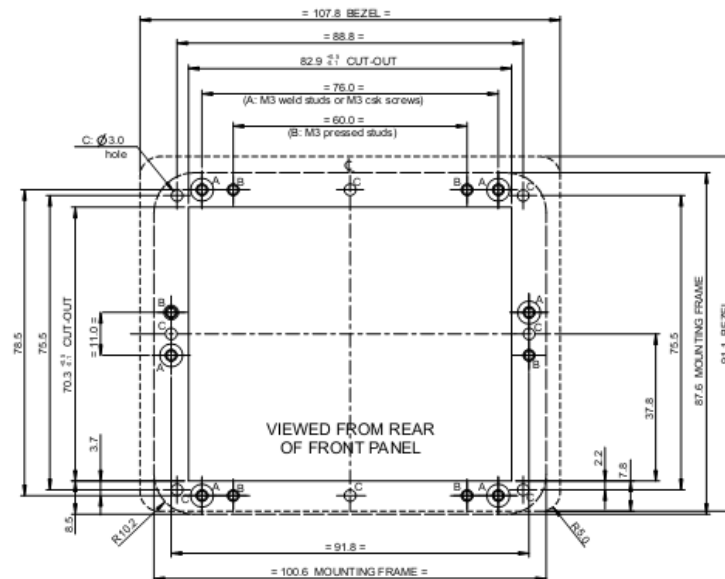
VM800B Panel Mount (Rear view)
